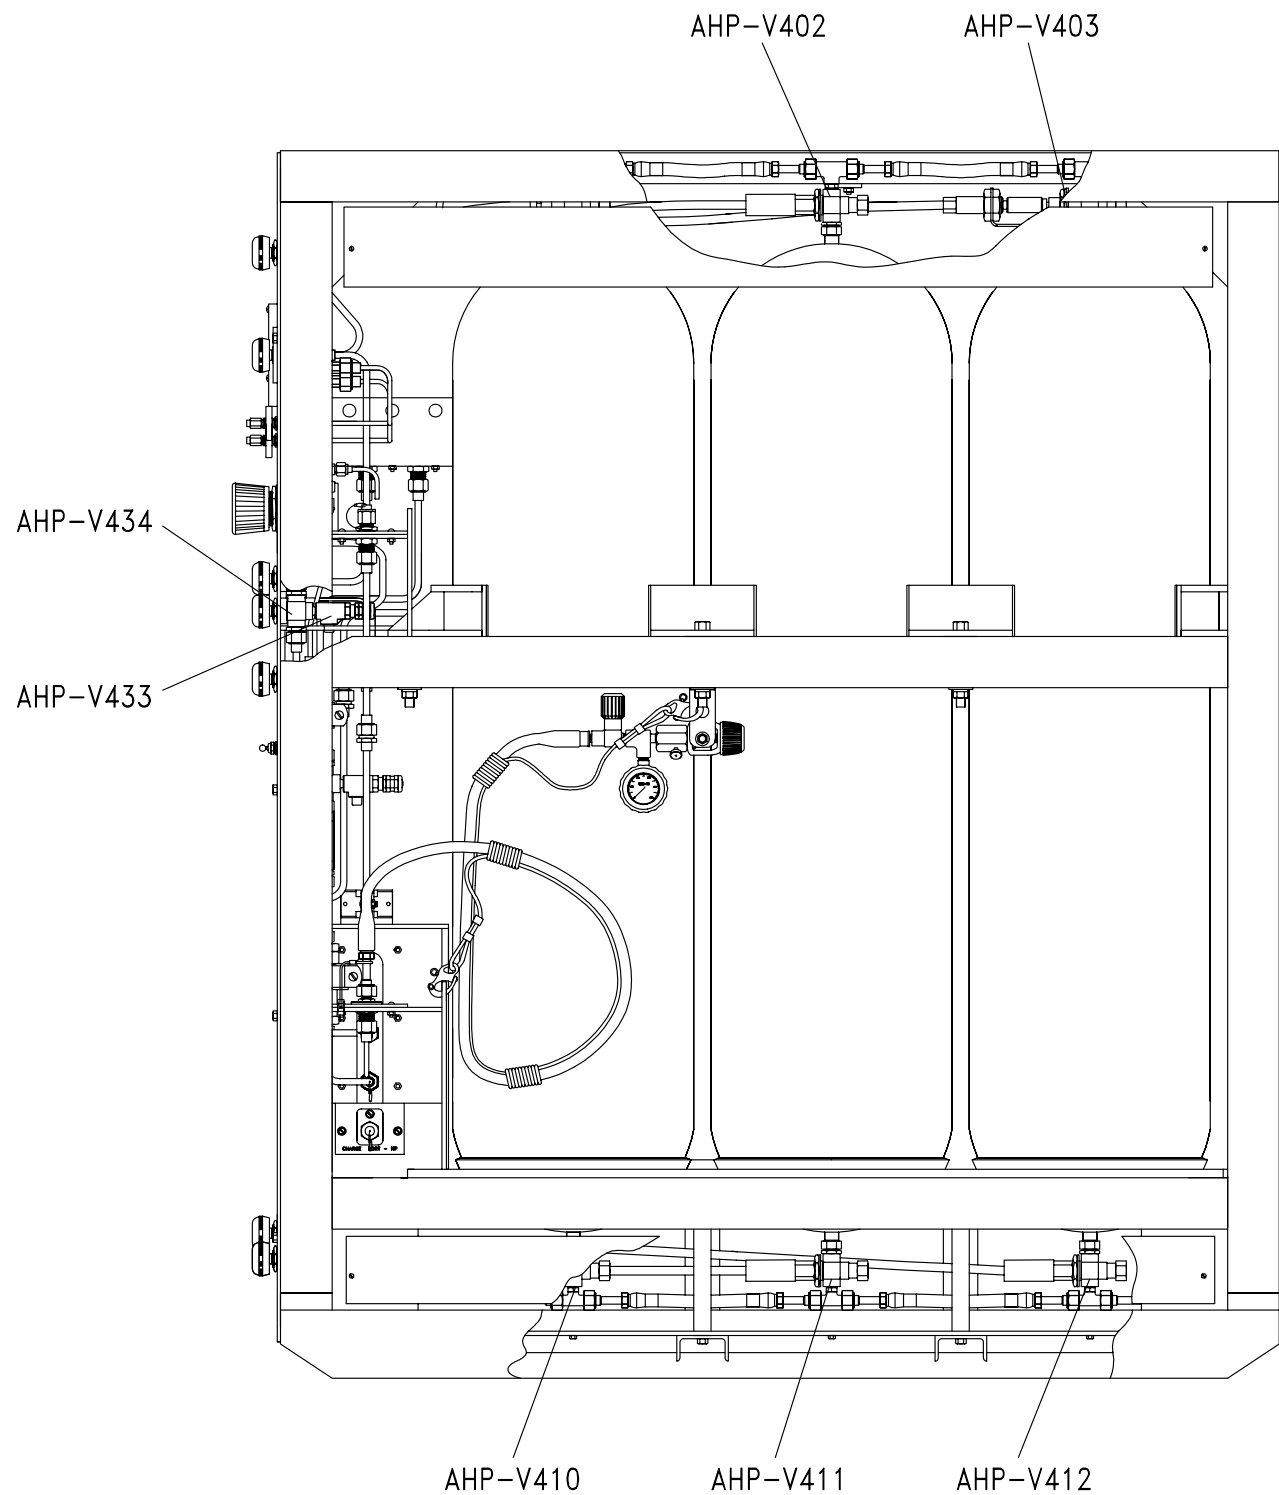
Air Flask Rack Assembly (AFRA), Side View
